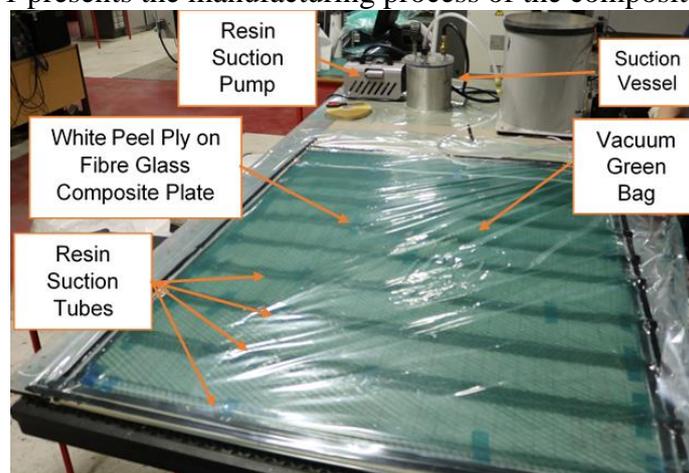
Glass fibre manufacturing by vacuum resin infusion process
